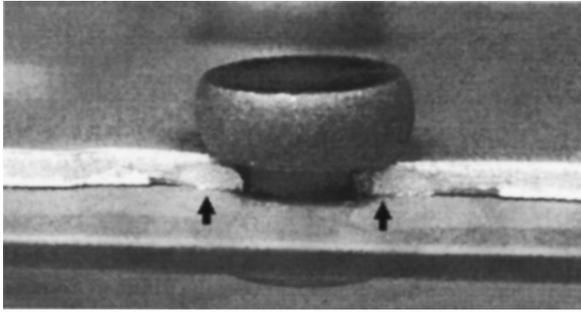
Semi-elliptical surface cracks in a fatigue failure of a riveted lap joint of sheet material. Crack nucleation occurred away from the rivet hole, see arrows.
